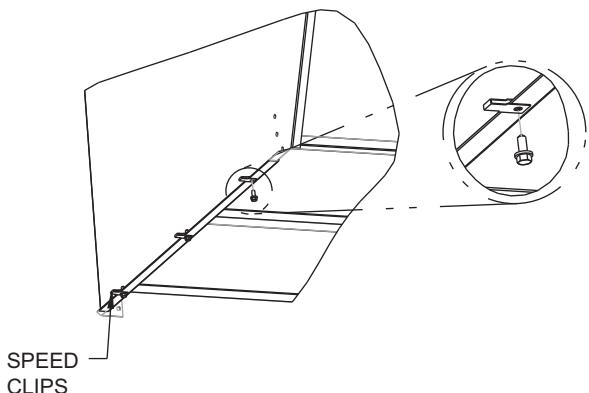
Bottom Filters Installed with Flange Pointing Down
